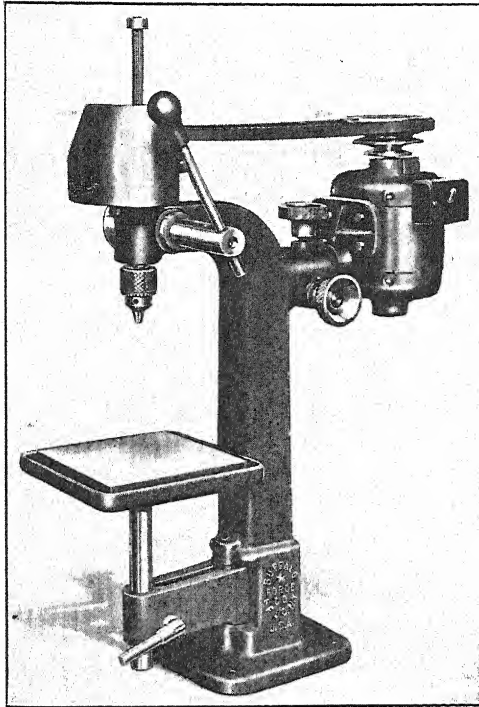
The Buffalo Forge Co. 10-In. Heavy-Duty Production-Type Sensitive Bench Drill Press.
